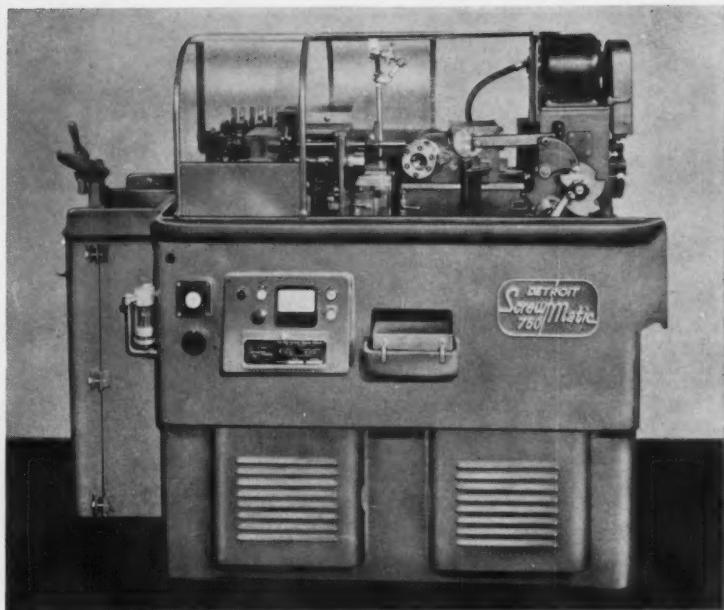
Detroit Screwmatic single-spindle automatic screw machine
